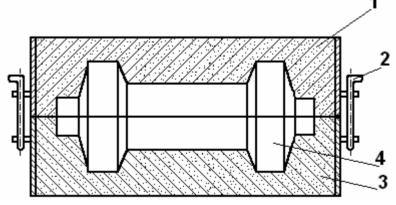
Manufacturing of mould top half: 1 – top flask; 2 – flask centering device; 3 – bottom flask; 4 – pattern
